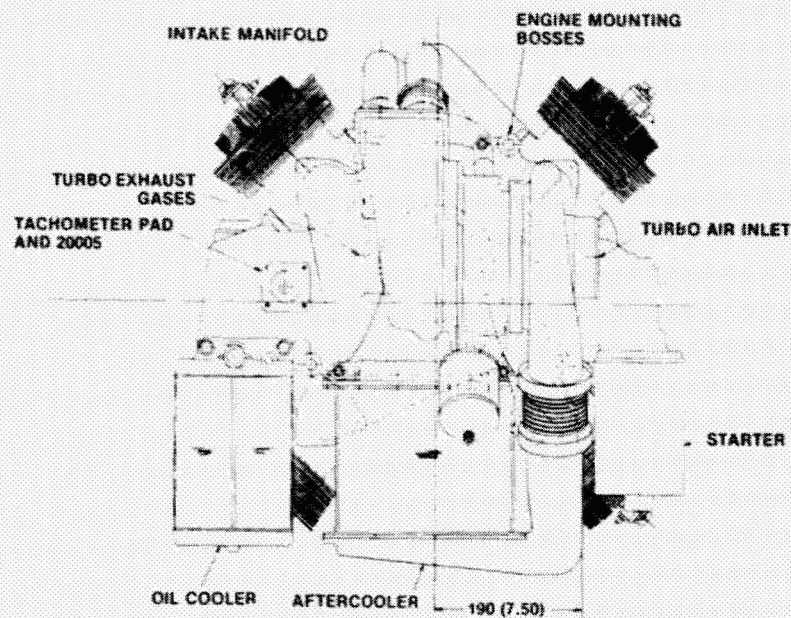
149 kW AIRCRAFT DIESEL—REAR VIEW
